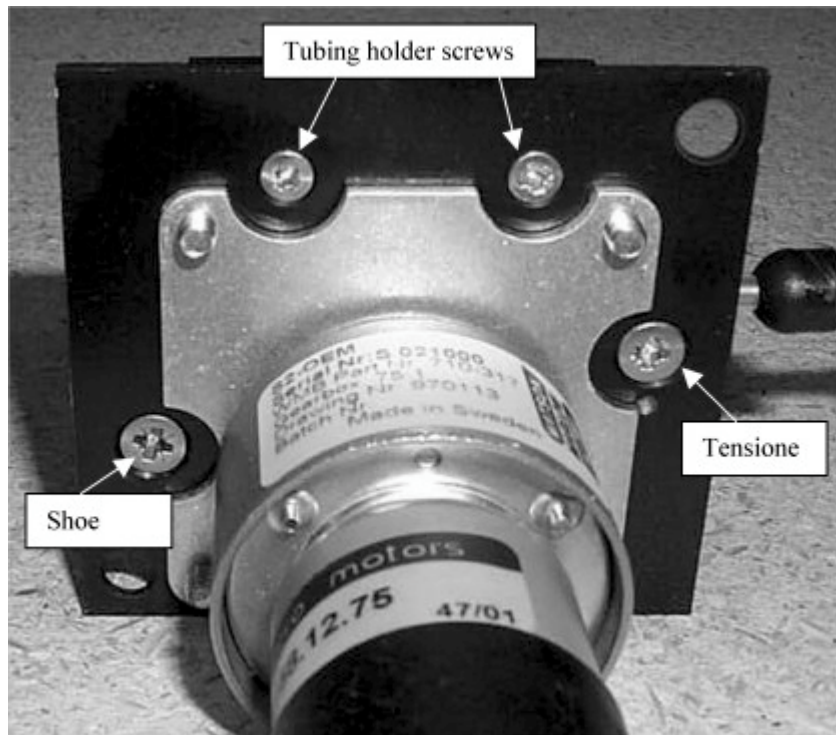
Removing shoe, tensioner, and tubing holder.
